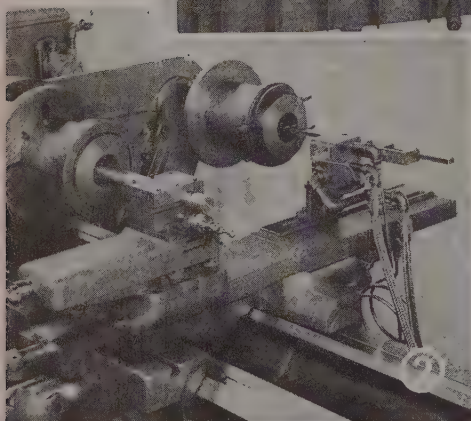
Rear view of lathe with profiling machine attached, showing adjustable brackets attached on machined ways on rear of lathe. At extreme left is hydraulic pump unit
